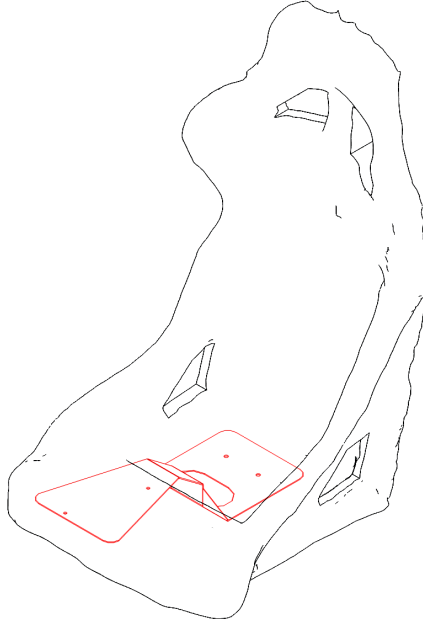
CAD model showing the joystick mount. Made with Solid Edge 2020 and Affinity Designer.
